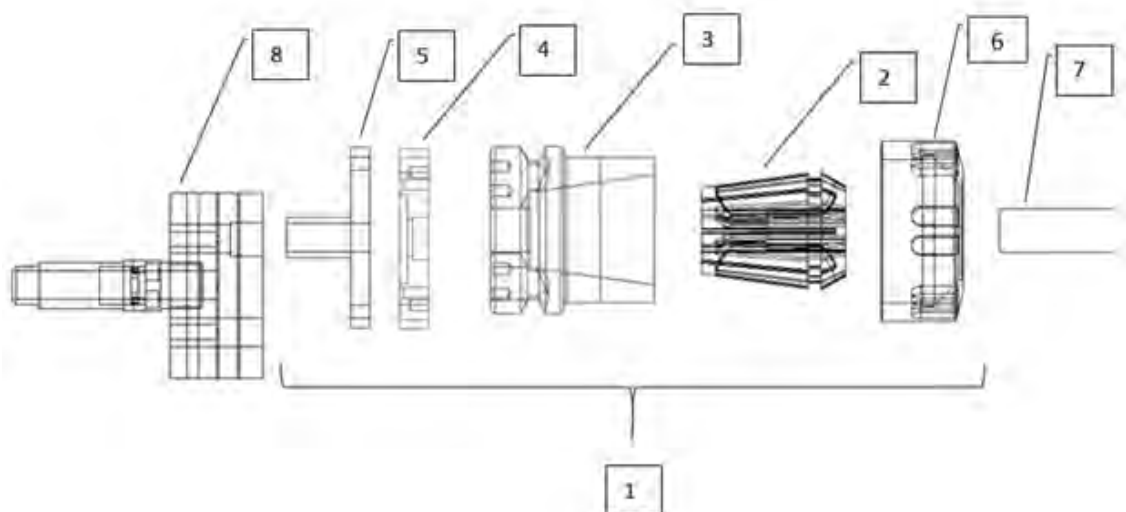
Probe holder unit (1) and its components: collet chuck (2), collet holder part (3), measurement chamber (4), molding connector (5) and pressure dome/nut (6) for holding the ATR-FTIR probe (7) and the sampling collector (8).
